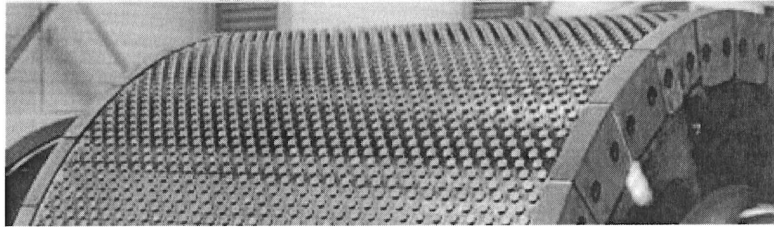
A photograph showing the Köppern side mounted bolt-on edge protection system.
